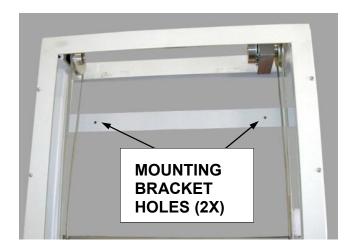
Vertical Wall Frame Wall Mounting Bracket
